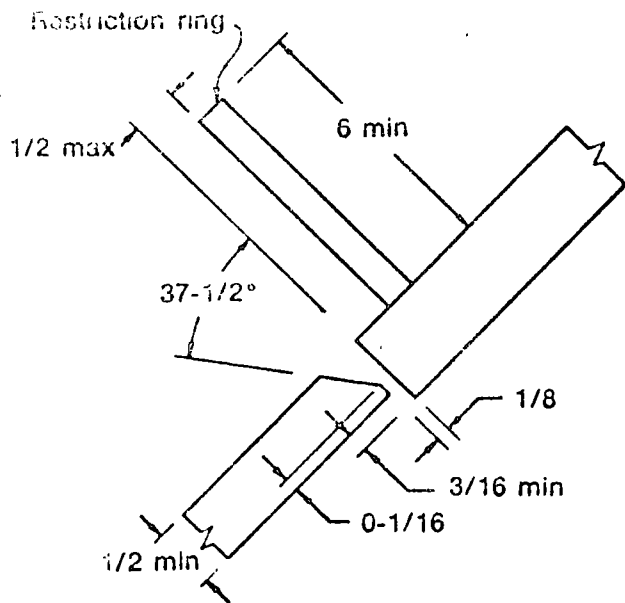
Test joint for T, K, and Y connections on pipe or square or rectangular tubing—welder qualification.
